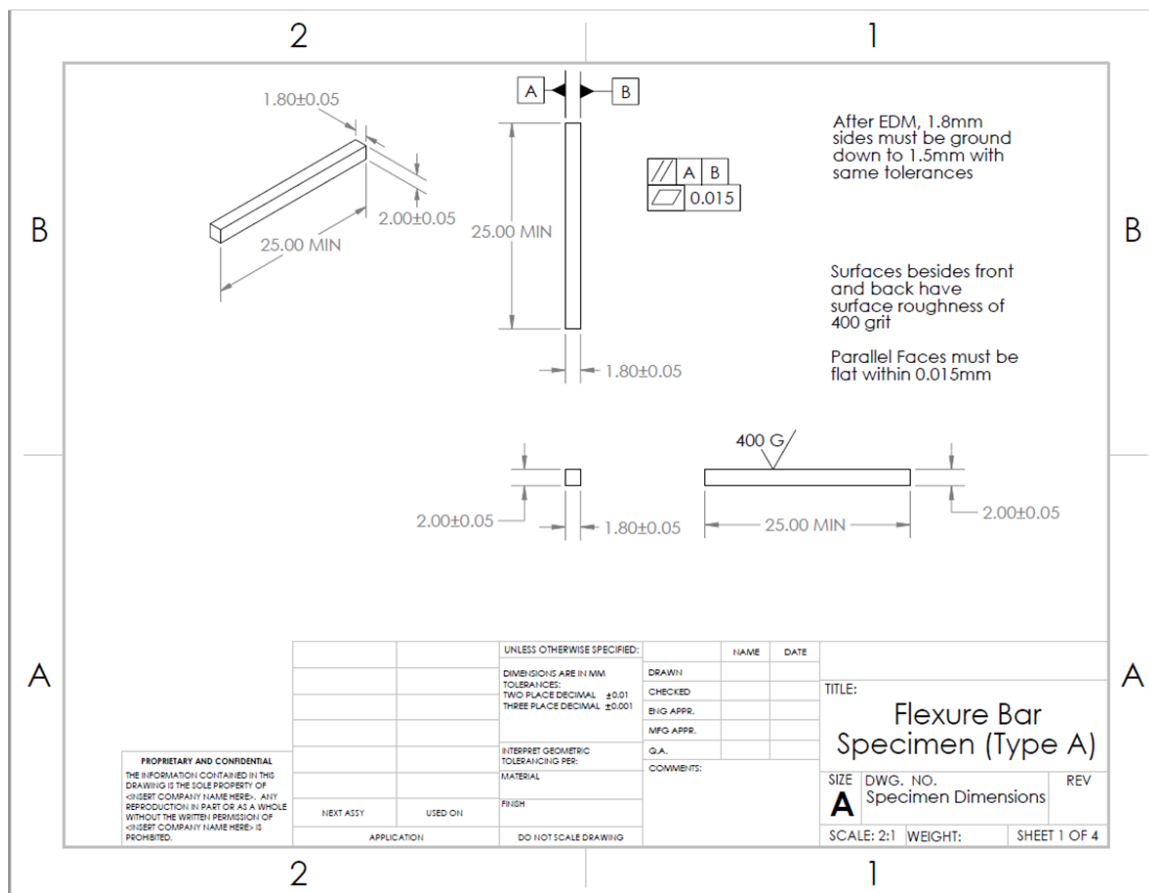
Dimensions and surface finish of Type A Flexure Bars.
